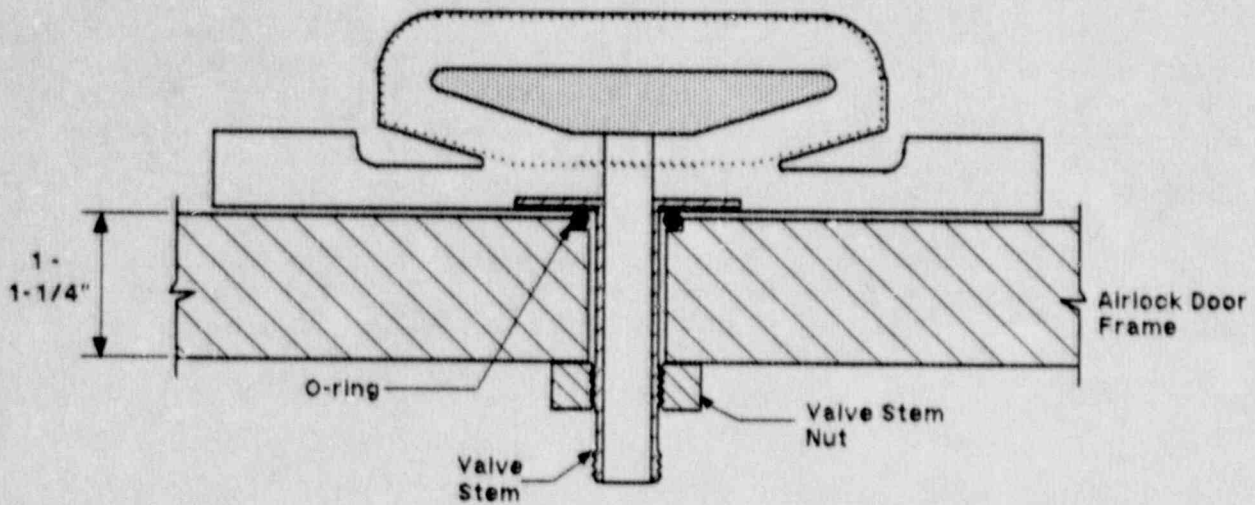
Typical Section Through the Valve Stem of an Airlock Door
